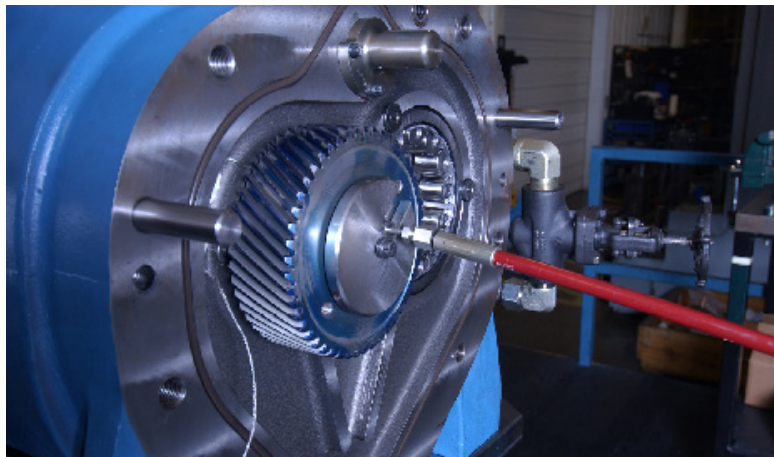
PRESSURIZING TO REMOVE PINION
